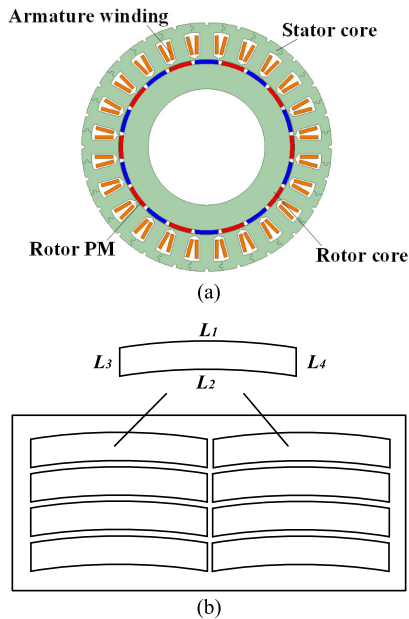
SMPMM and its rotor PMs. (a) Topology of the SMPMM in direct-drive industrial turbine. (b) rotor PMs and rotor PMs on the blank.
